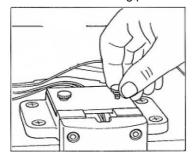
Fixing Headrest with wire retaining plate and thumbscrews
